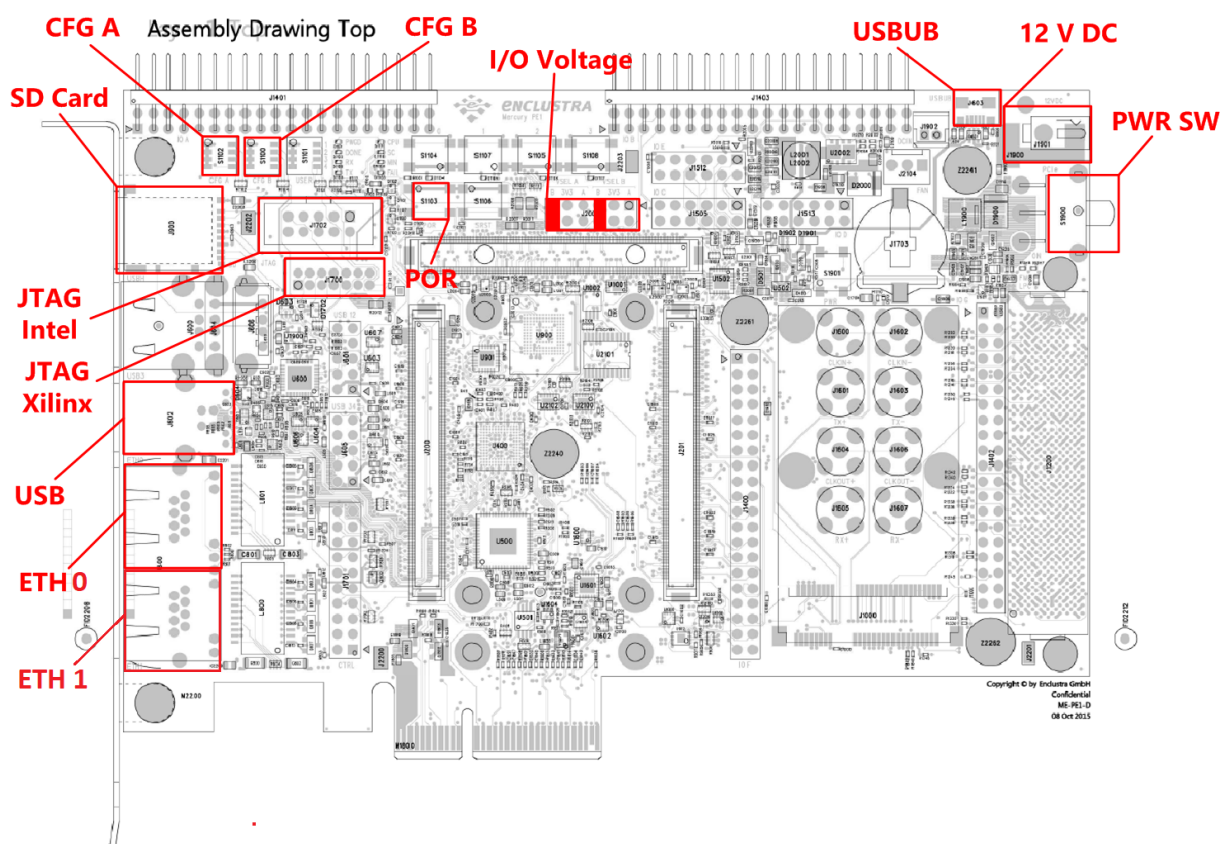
Mercury+ PE1 Base Board Assembly Drawing (Top View)
